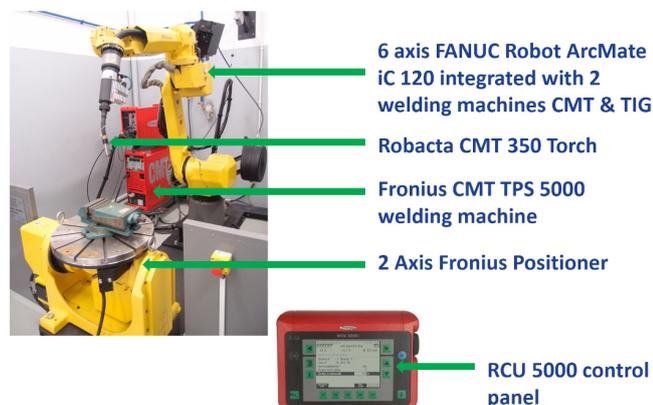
Workstation with an Industrial robot FANUC ArcMate120iC, 2 axial positioner (Fanuc) and TPS 5000 CMT welding source (Fronius)
